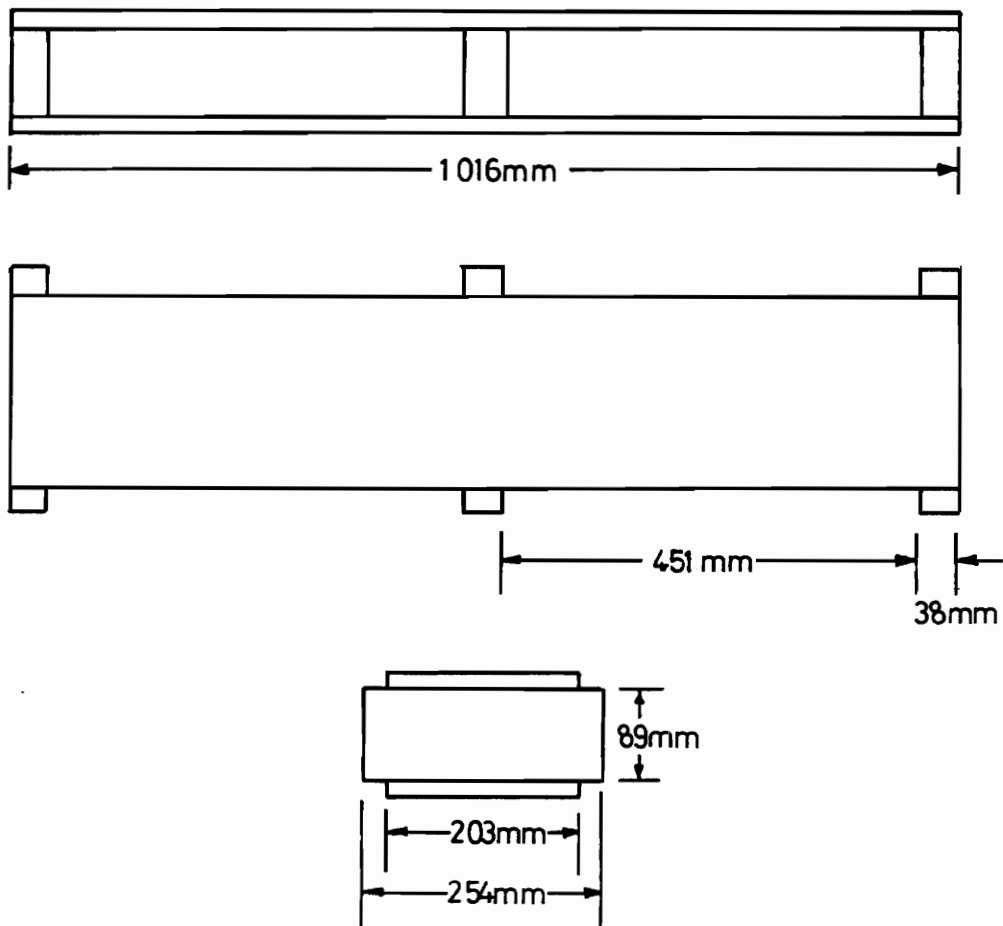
Schematic diagram of the pallet section model used for forced vibration testing of pallet decks.
